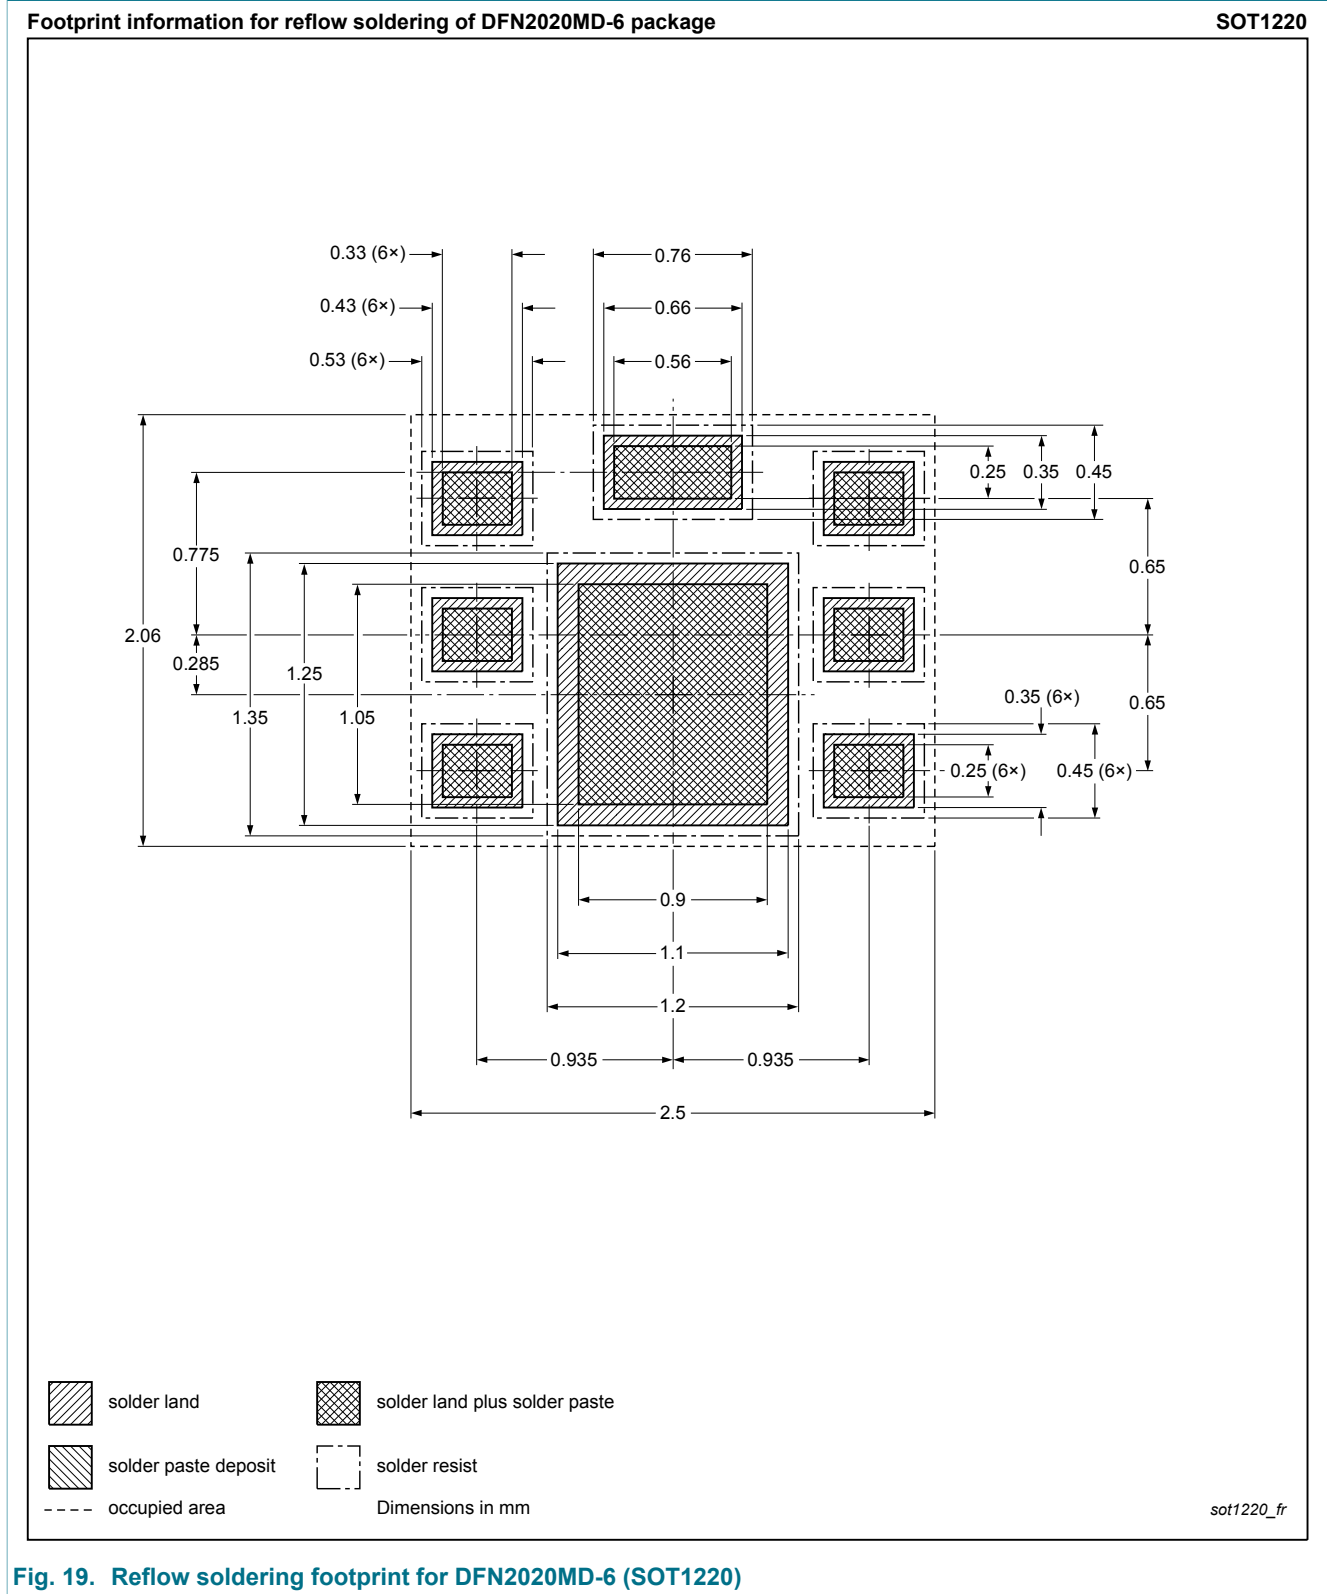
Reflow soldering footprint for DFN2020MD-6 (SOT1220)
